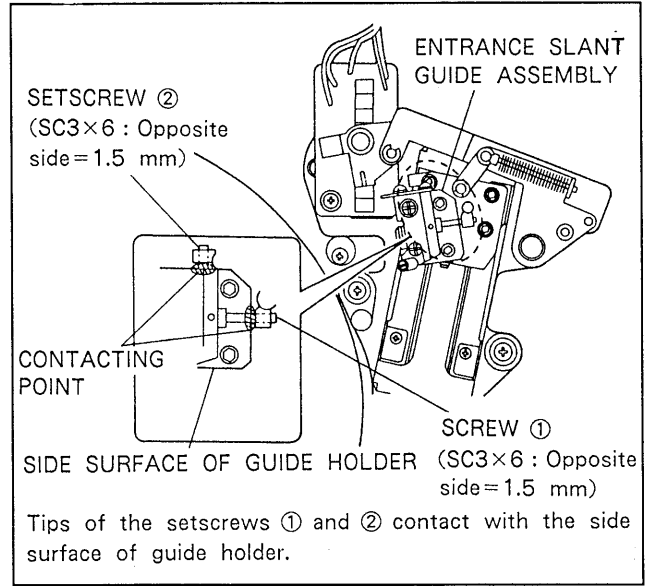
Screw Position of Entrance Slant Guide
